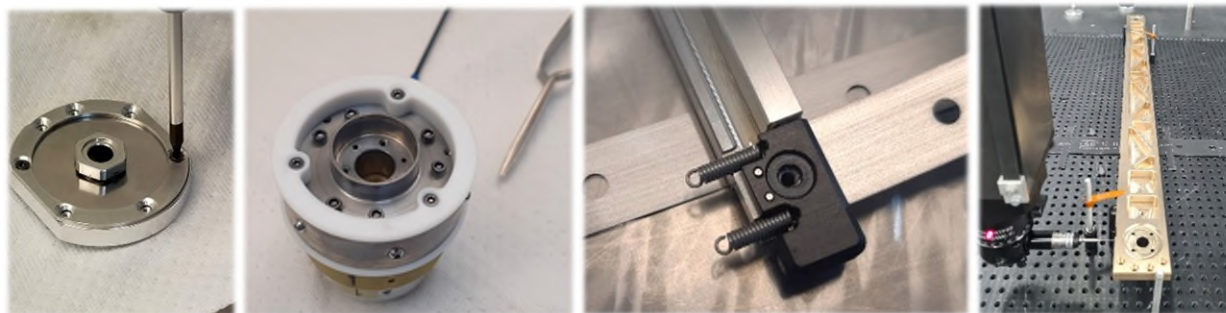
Breadboard Component Photos: Diaphragm spring pack (left), sprocket wheel/flex assembly (center left), spreader bar slider (center right), sidewall structure in final inspection (right)
